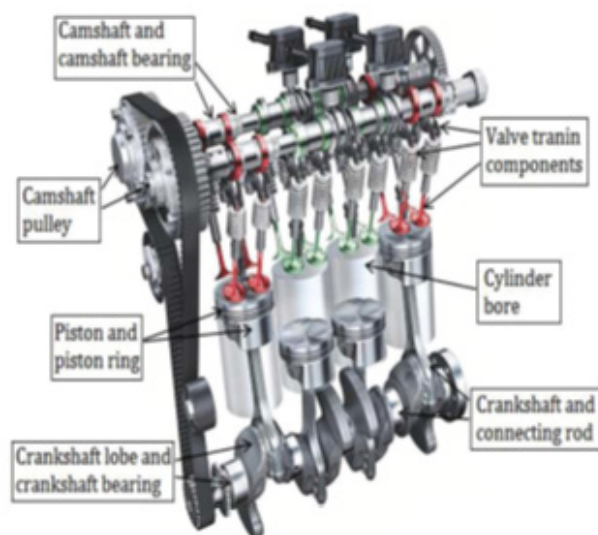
Typical components affecting the friction loss of internal combustion engine.[10]
